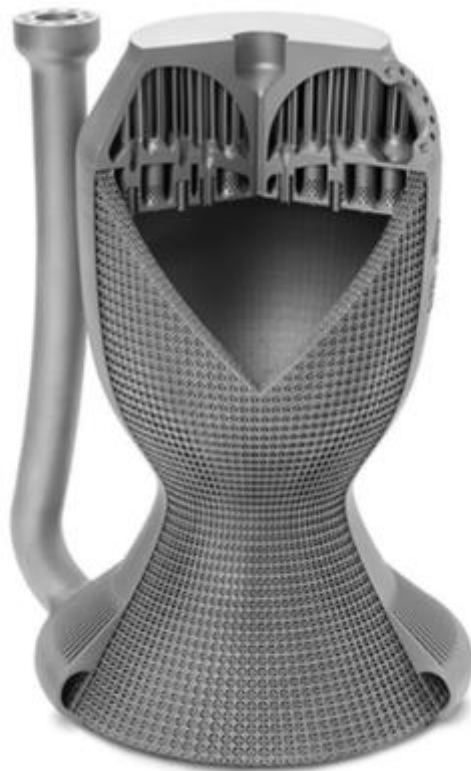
Combustion chamber, injector, manifolds, cooling channels produced by AM. Copyright: ©SLM Solutions/ CellCore [5]
